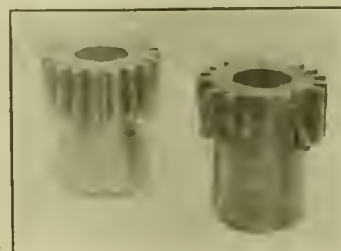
STEEL PINION TO REPLACE CAST-IRON ONE IN COACH WHEEL LATHE.
